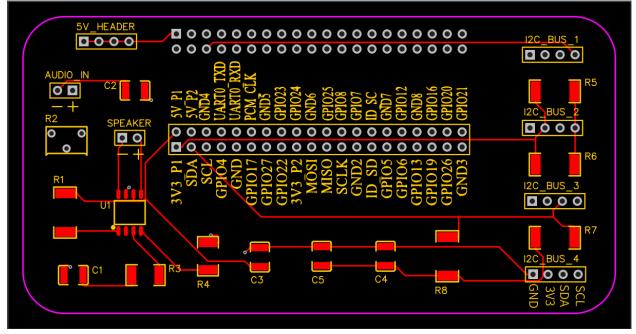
PCB layout. Printed on a 100x50mm board. Component values are shown in the "Part Information" section of this guide.
